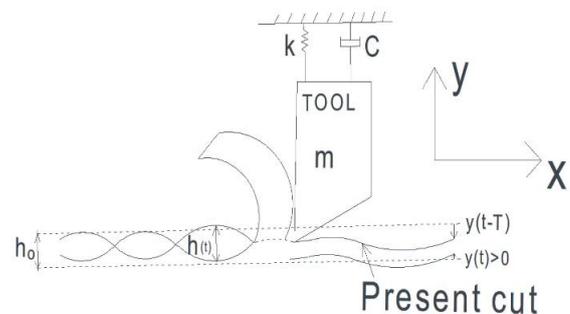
Sketch of the turning process (m – mass of the machining tool)
